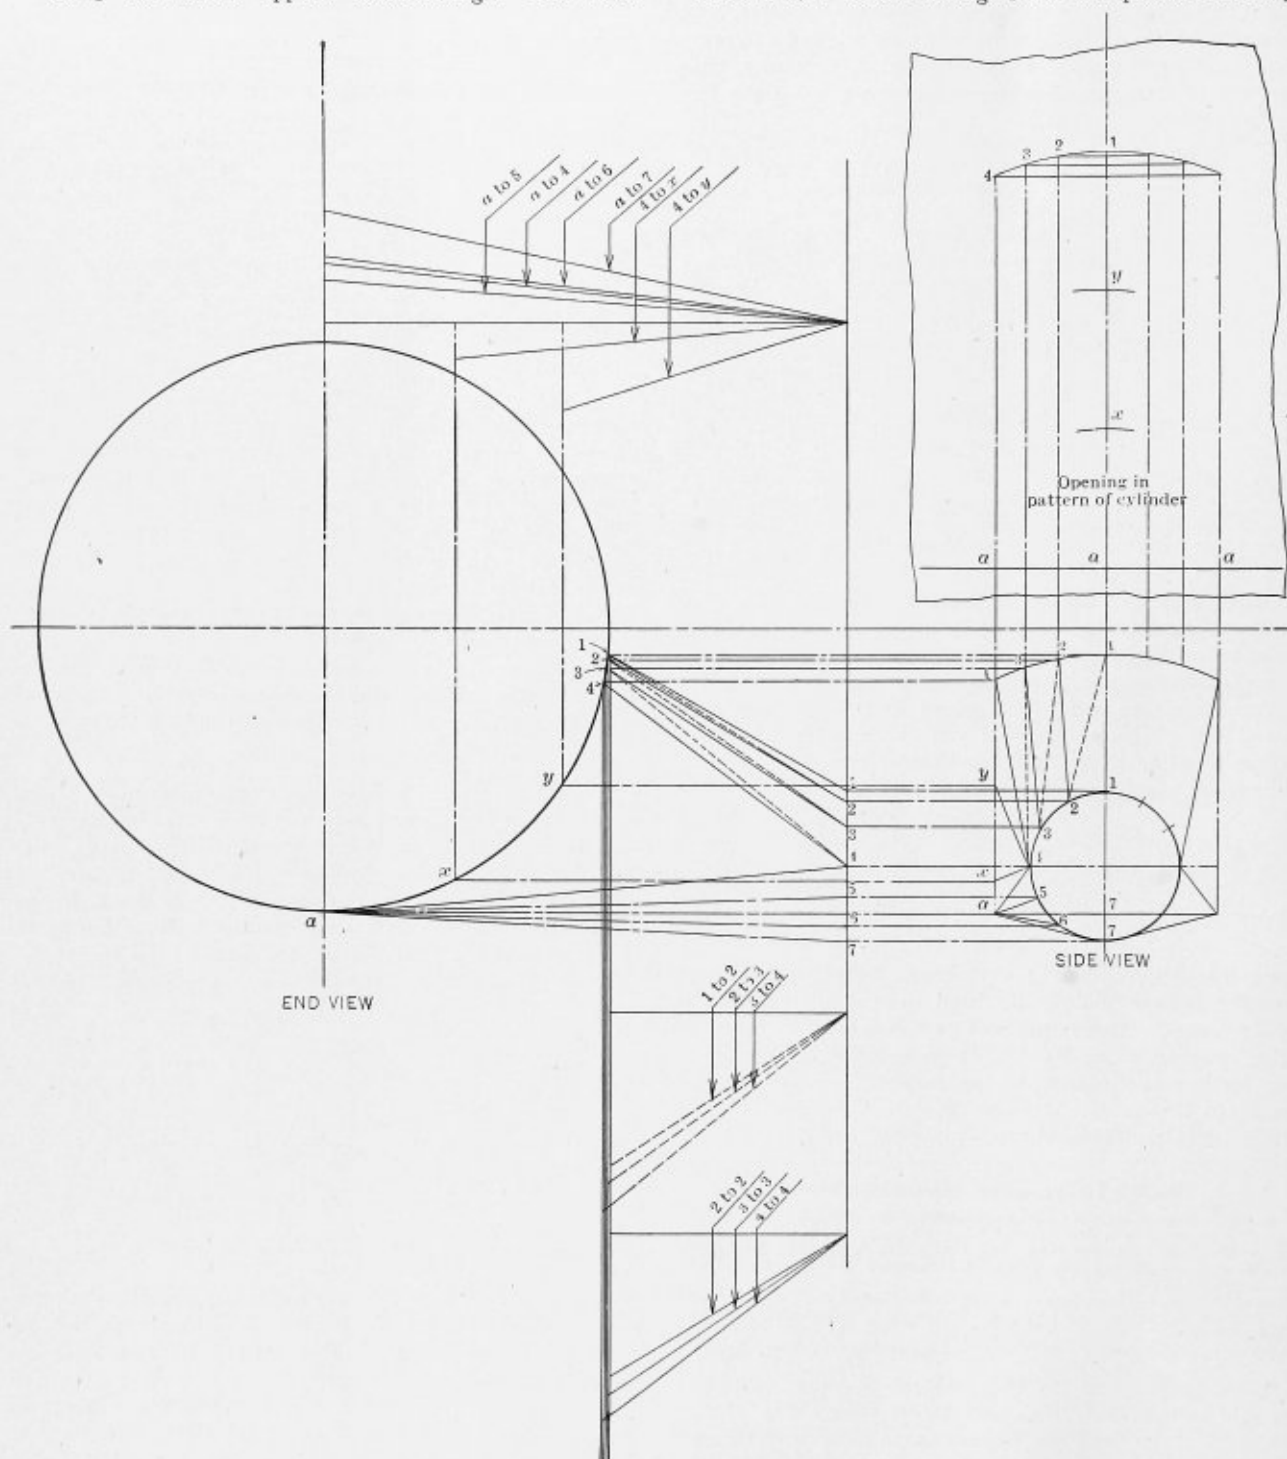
Development of Transition Pieces Intersecting a Cylindrical Pipe Off Center
